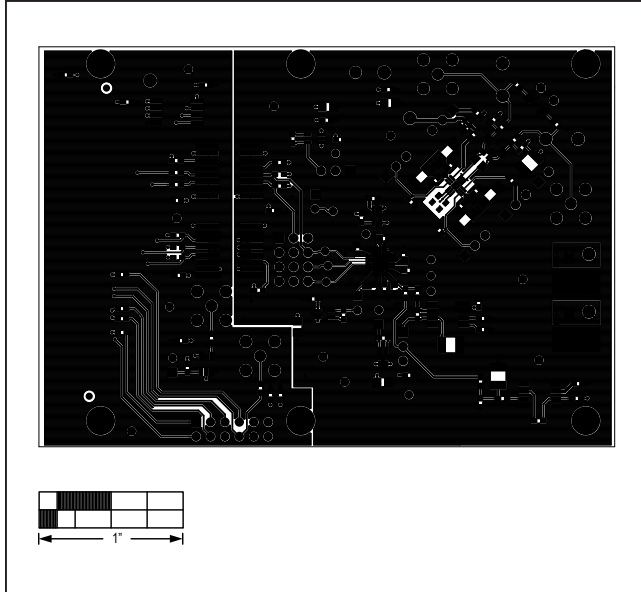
MAX11905 Differential EV Kit PCB Layout—Component Side
